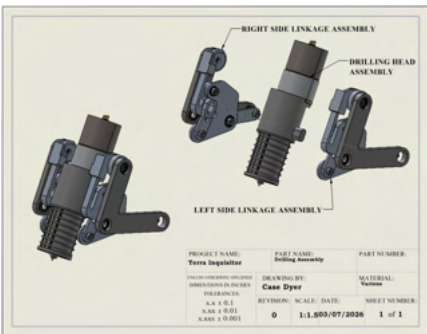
Final linkage geometry after printed iteration of crank, rocker, slot-link, actuator, and auger alignment.
